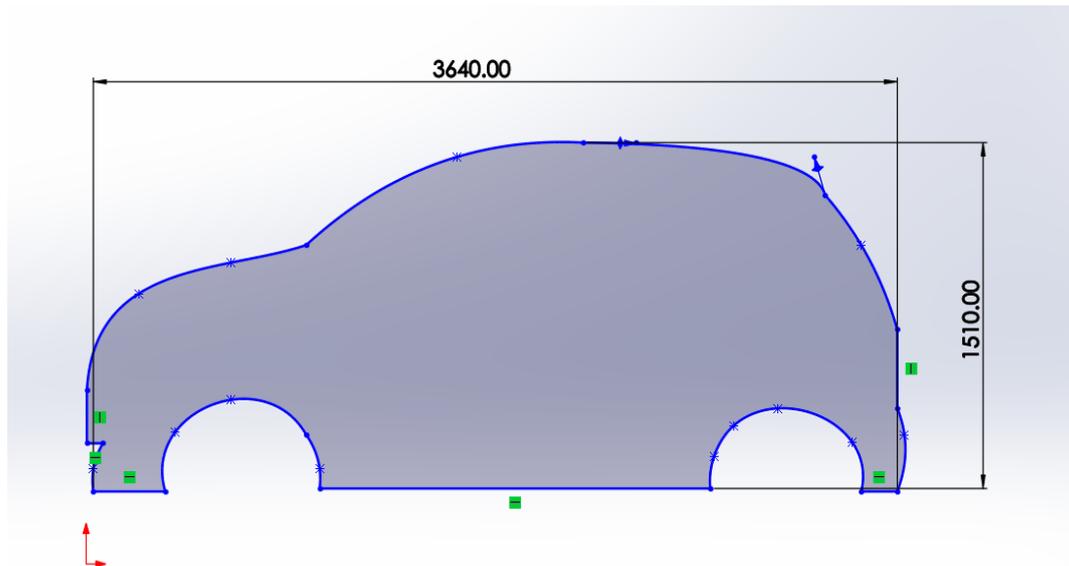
SOLIDWORKS drawing of a car with dimensions in millimeters.
